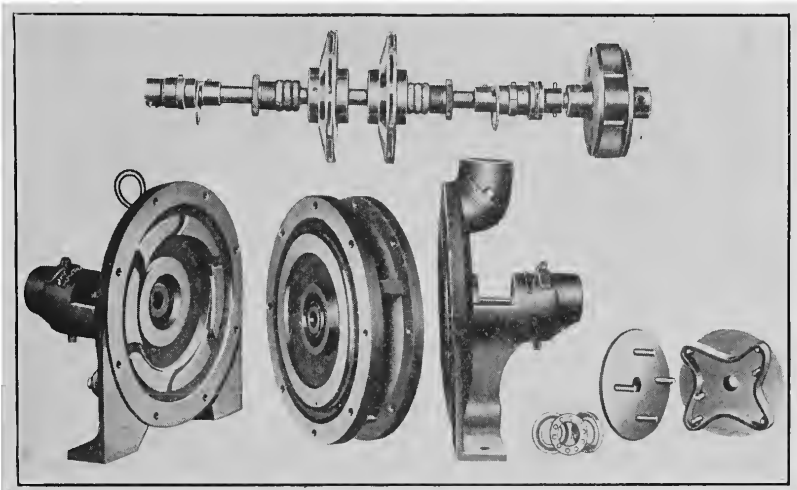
Details of turbine pump. (*Chicago Pump Co.*)
